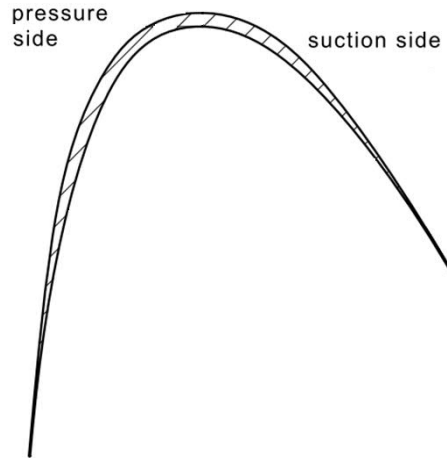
Cross-sectional view of PowerEdge® shell geometry.
